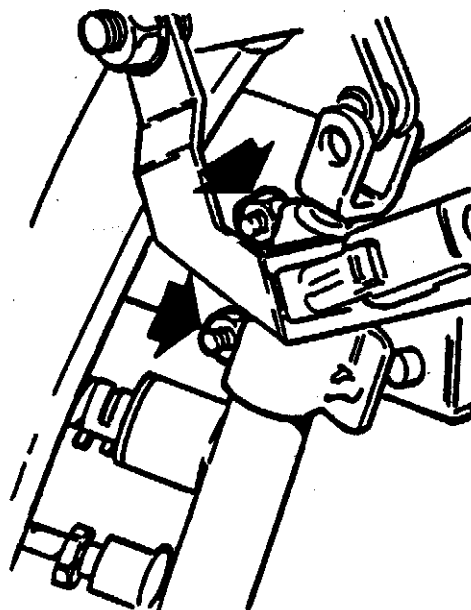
Fit the master cylinder onto its mounting bracket and tighten the nuts.
